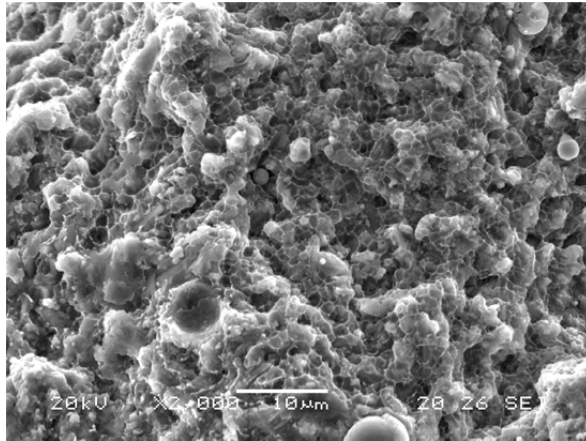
Fractograph of the laser welded joint with 0.3 mm thick Ti filler
